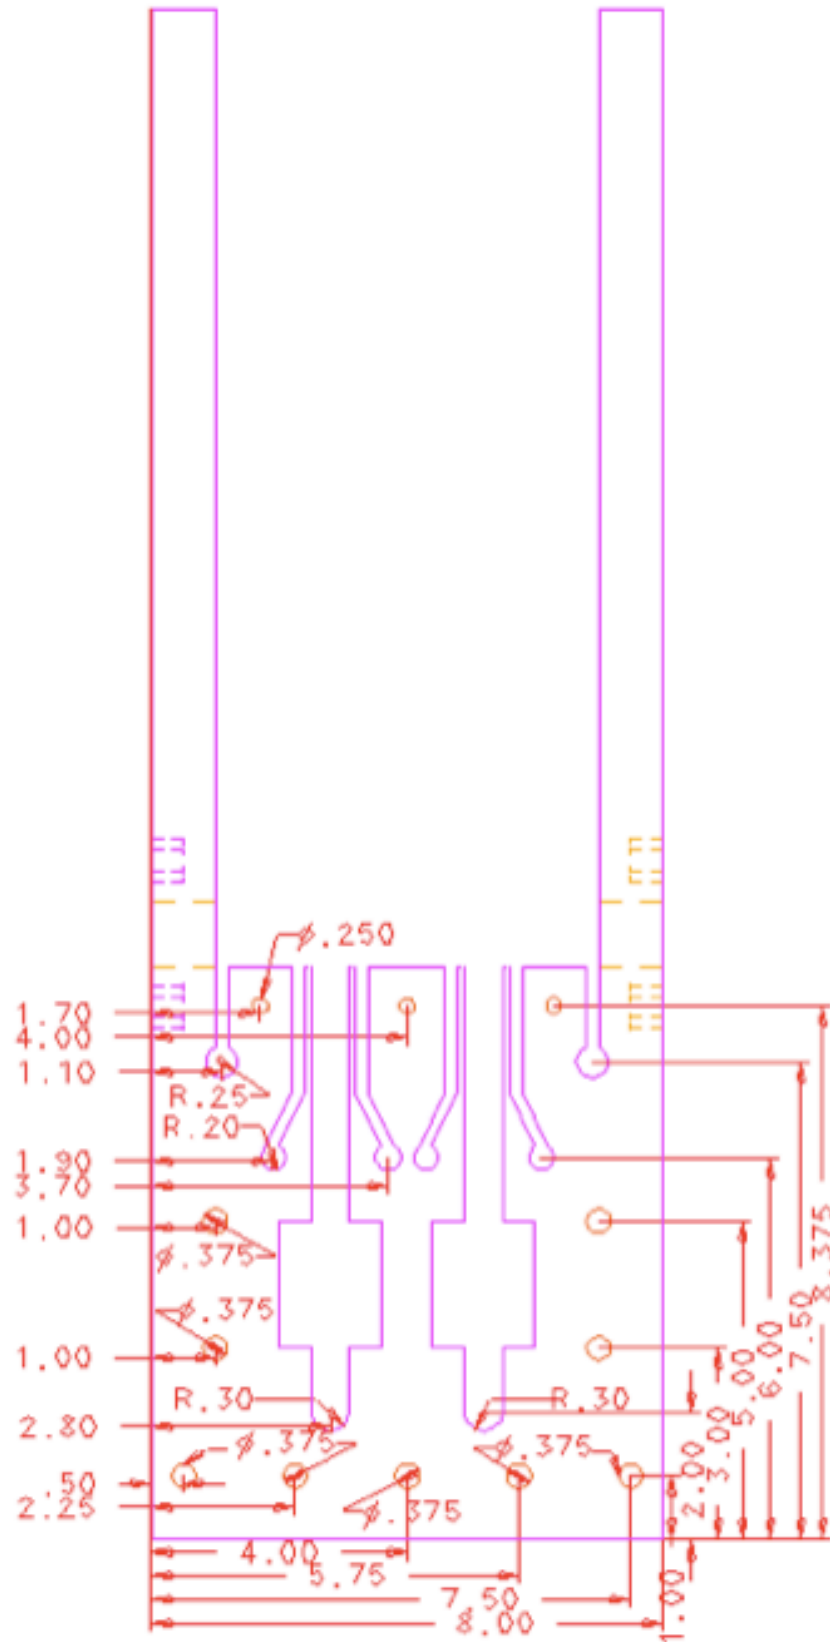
Schematic view of the double-injector shear coax combustor for oxidizer and fuel inlet. Unit:inch.
